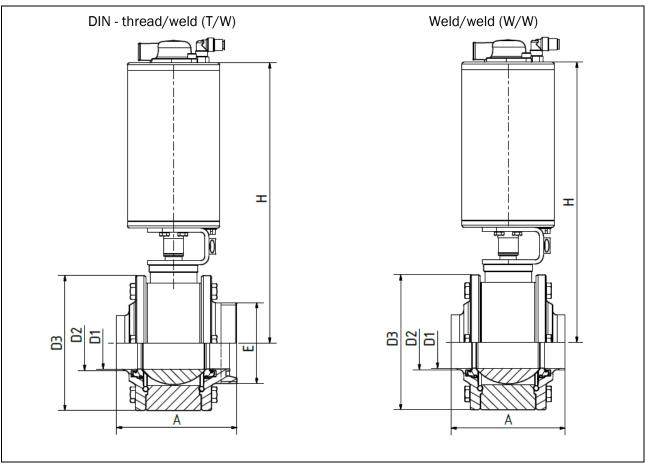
Ball valve with pneum. actuator: Connection variants: thread/weld, weld/weld
